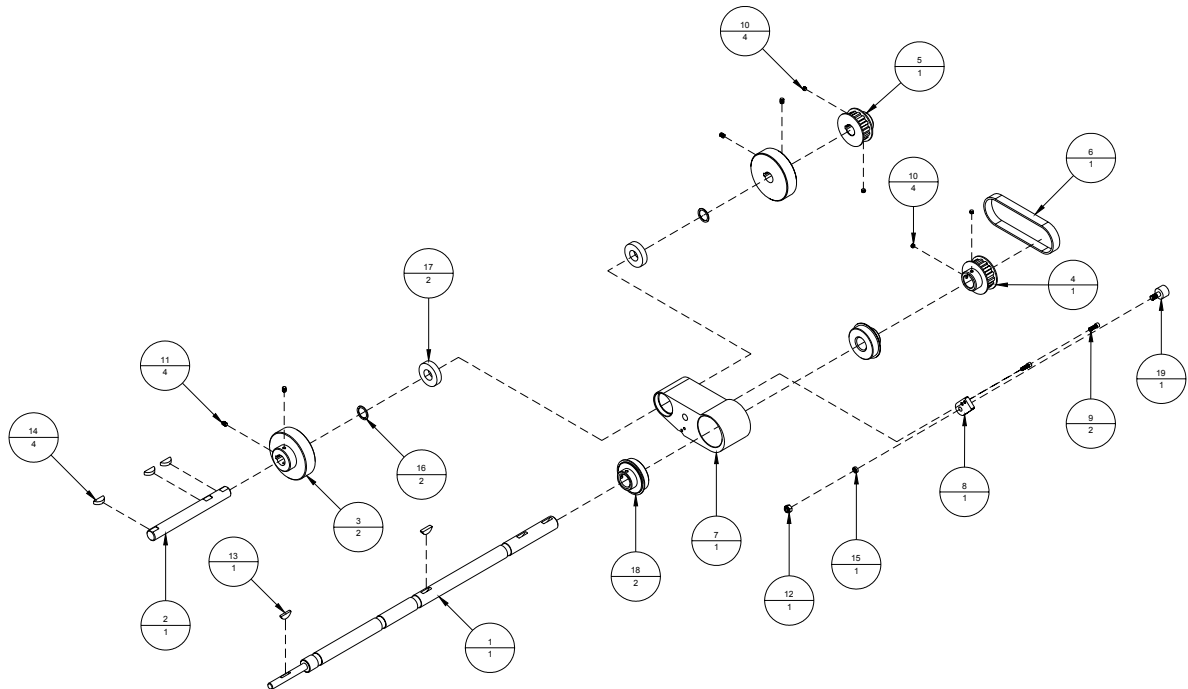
Feed Roller Driveshaft Assembly (100603A)
